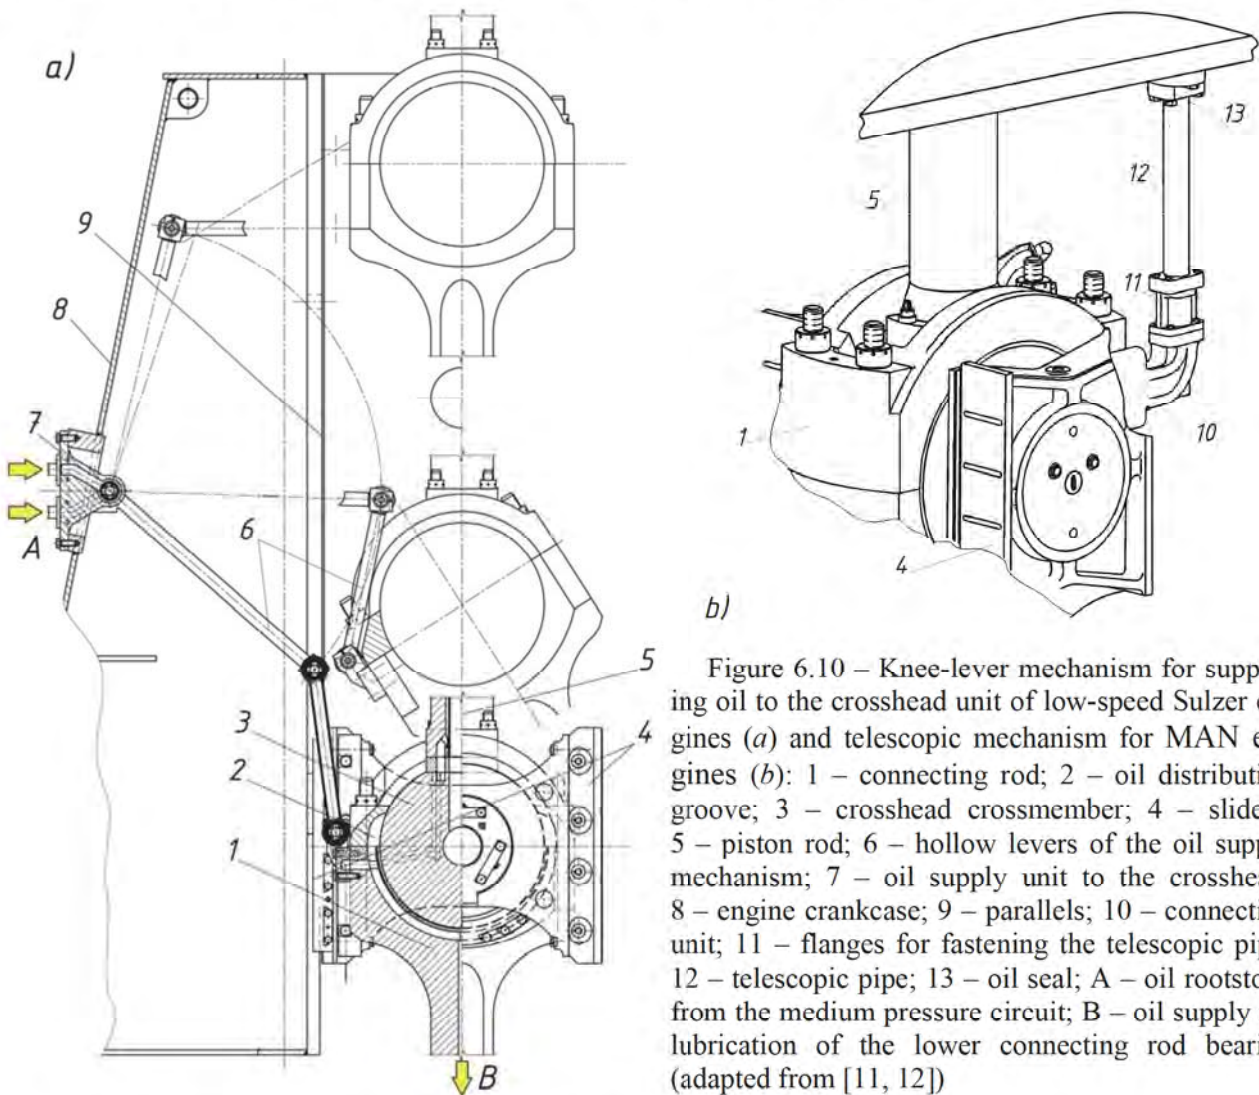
Knee-lever mechanism for supplying oil to the crosshead unit of low-speed Sulzer engines (*a*) and telescopic mechanism for MAN engines (*b*): 1 – connecting rod; 2 – oil distribution groove; 3 – crosshead crossmember; 4 – sliders; 5 – piston rod; 6 – hollow levers of the oil supply mechanism; 7 – oil supply unit to the crosshead; 8 – engine crankcase; 9 – parallels; 10 – connecting unit; 11 – flanges for fastening the telescopic pipe; 12 – telescopic pipe; 13 – oil seal; A – oil rootstock from the medium pressure circuit; B – oil supply for lubrication of the lower connecting rod bearing (adapted from [11, 12])
